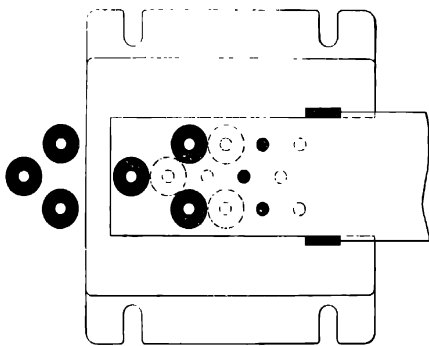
Mode of piercing and blanking washers from roll-fed strip.
